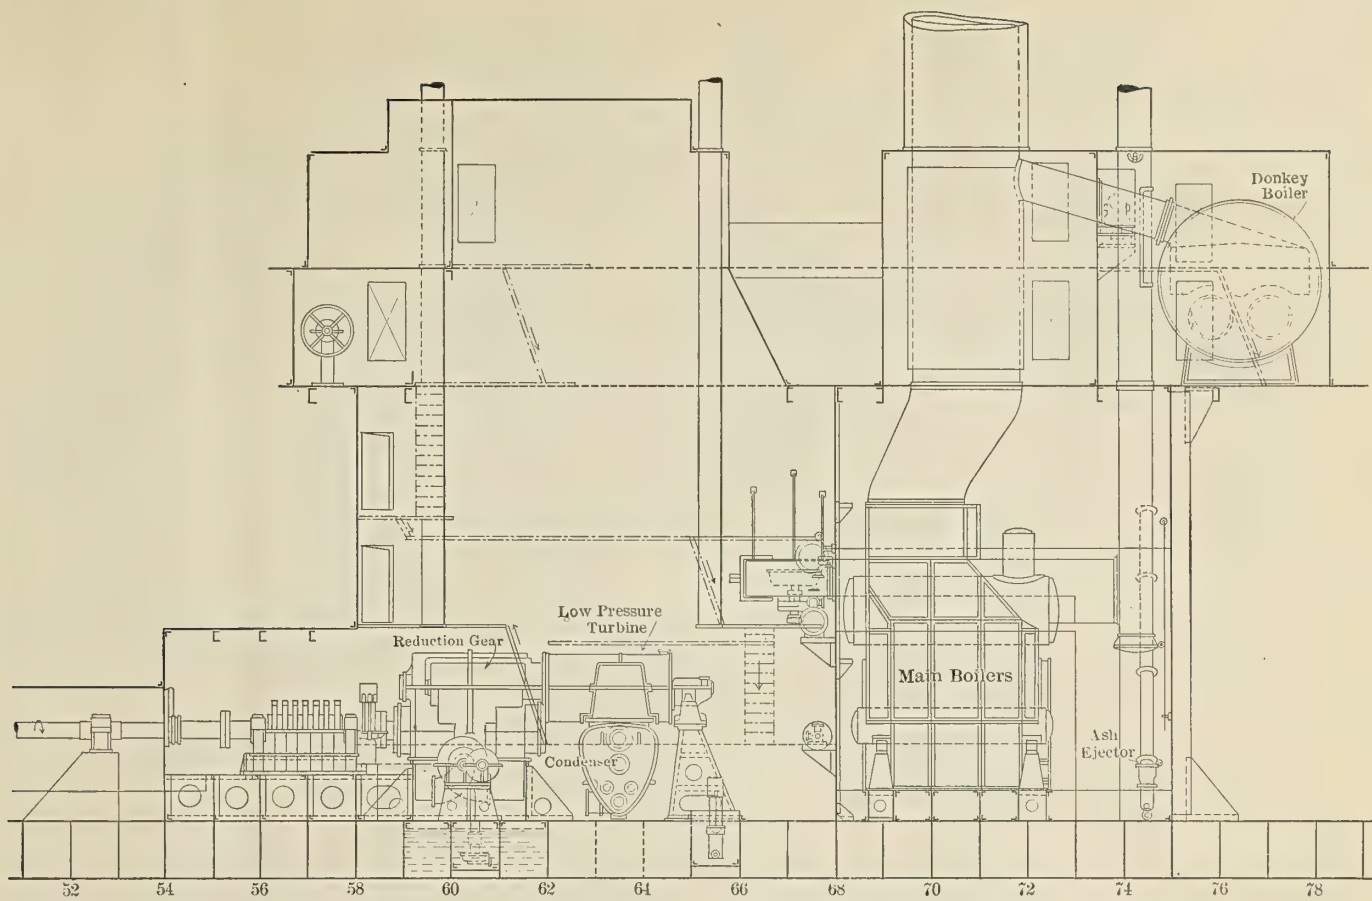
Longitudinal Section Through Machinery Space, 3,000 Horsepower Cargo Steamer
